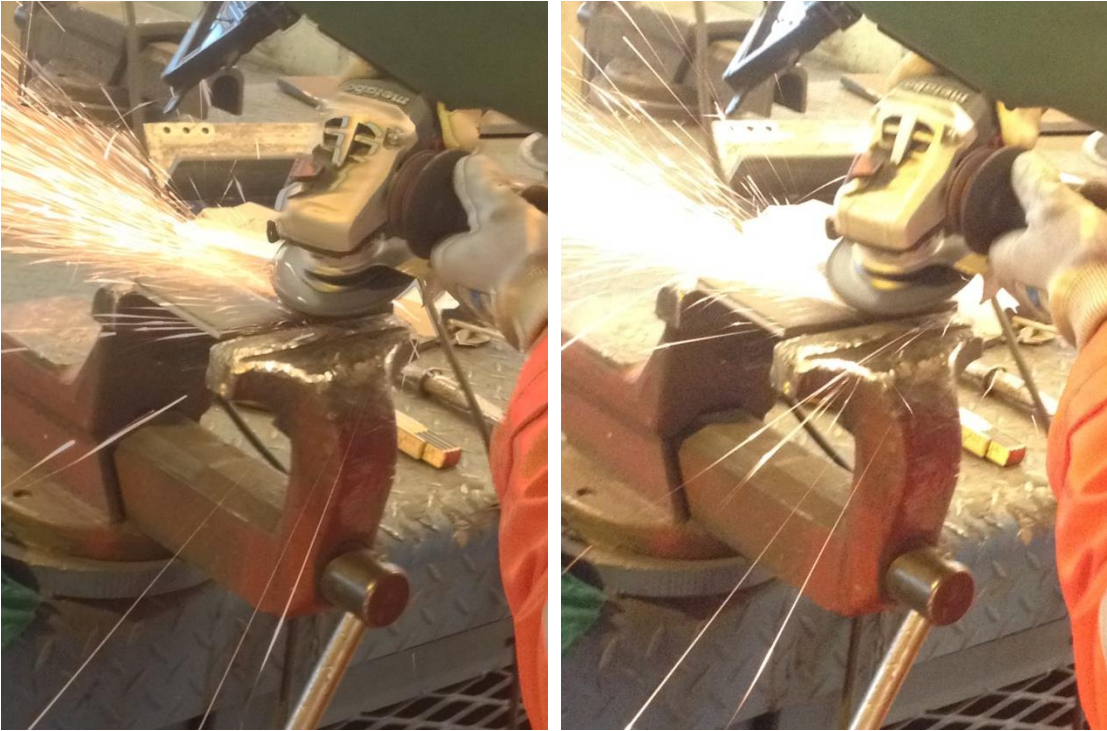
, Figure 5-6 & Figure 5-7pre and post cut of welded plates
